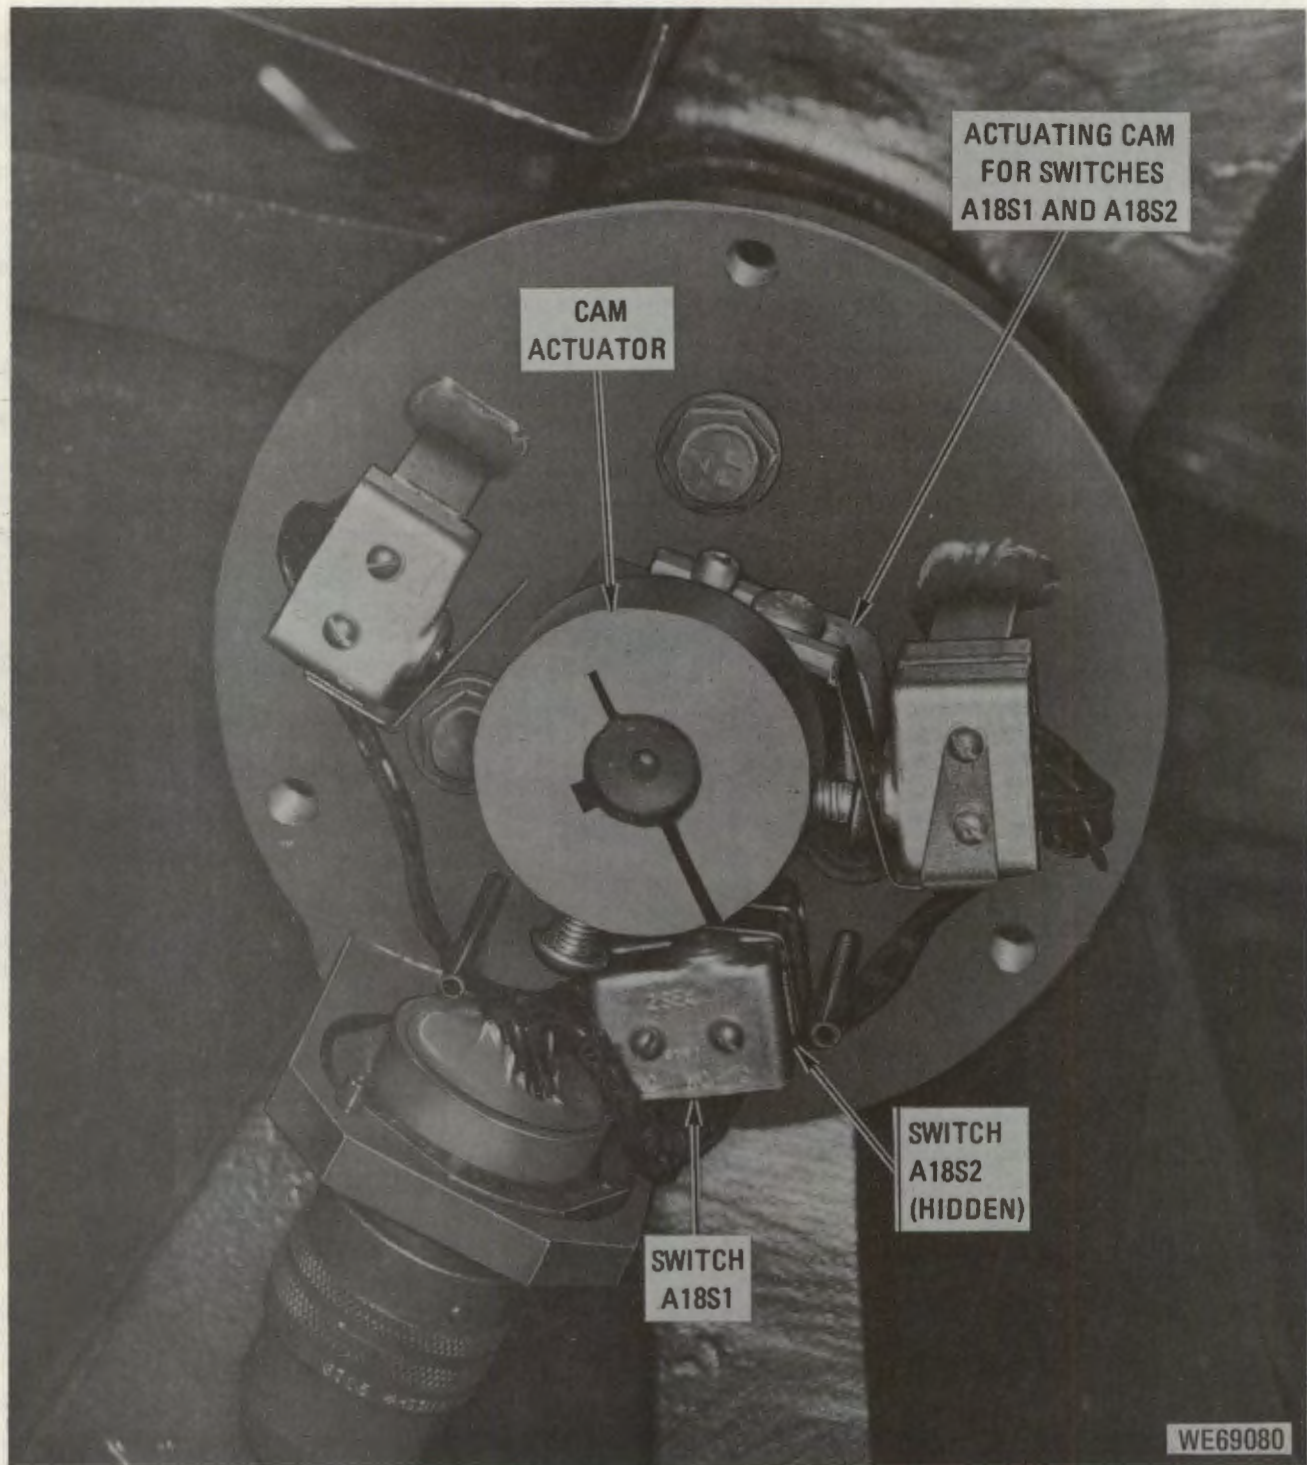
Elevation limit switch assembly, cover removed, orientation of actuating cam with cannon at maximum elevation angle.
